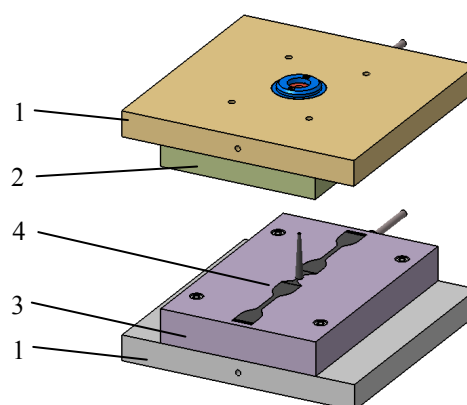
Assembly of injection mold; 1 – frame, 2 – upper plate, 3 – lower plate, 4 – testing samples
